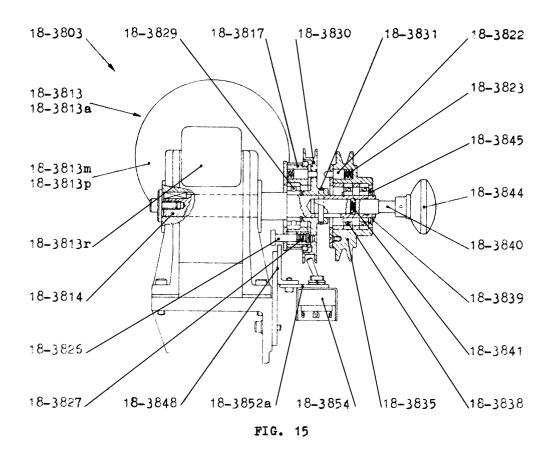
NOTOR AND GEAR BOX FOR TAKE-UP AND REWIND ASSEMBLY
